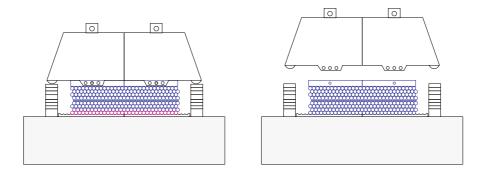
Schematic view of the chamber assembly. The last layer is glued.
